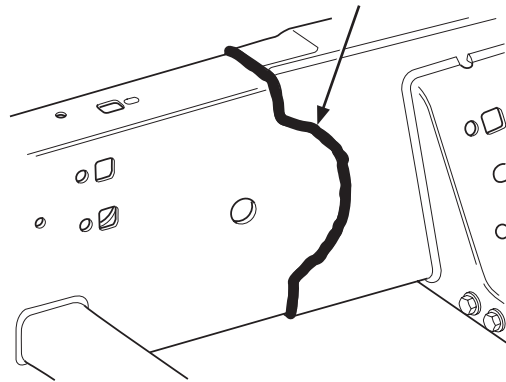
FRONT RAIL TO CENTER SIDE RAIL MARRIAGE JOINT WELD INBOARD (LH SHOWN, RH IS SYMMETRICALLY OPPOSITE)
